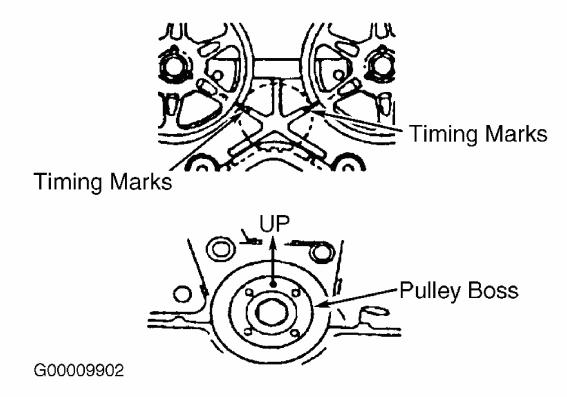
Aligning Timing Belt Sprockets (Miata) Courtesy of MAZDA MOTORS CORP.
